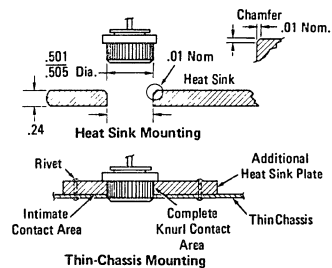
MOUNTING DETAILS FOR PRESSFIT THYRISTORS
